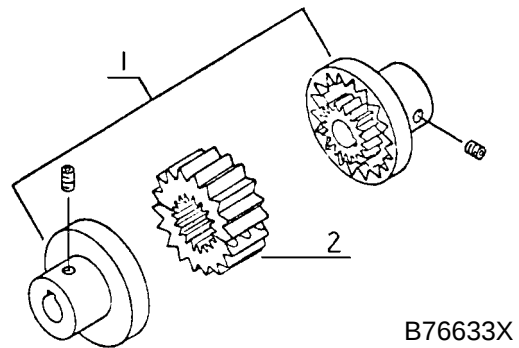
INSTALLATION OF COUPLING – STYLE “B”
